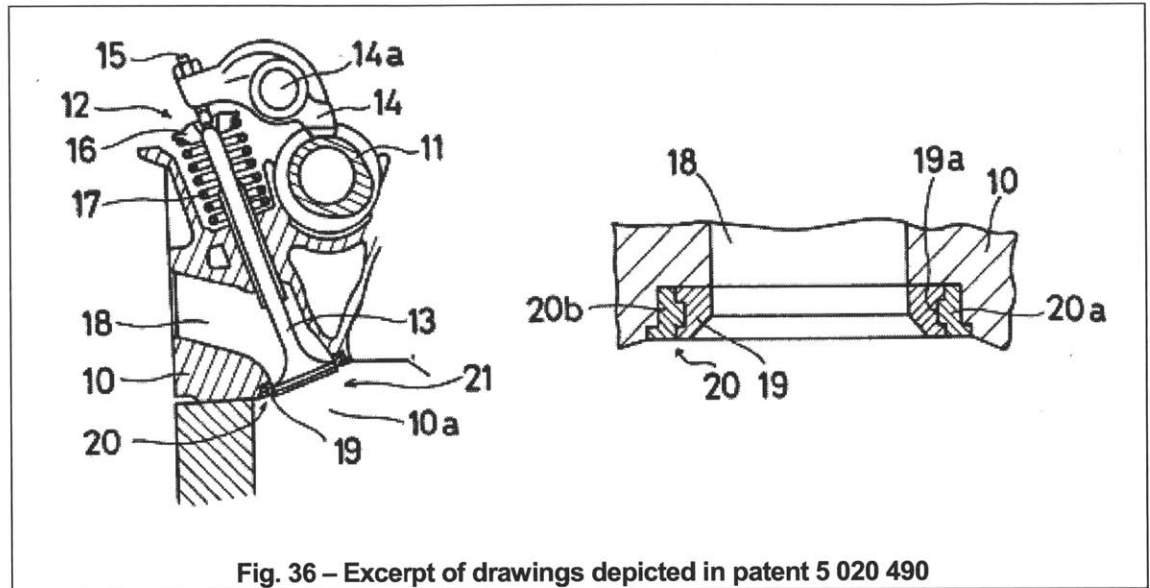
Excerpt of drawings depicted in patent 5 020 490
